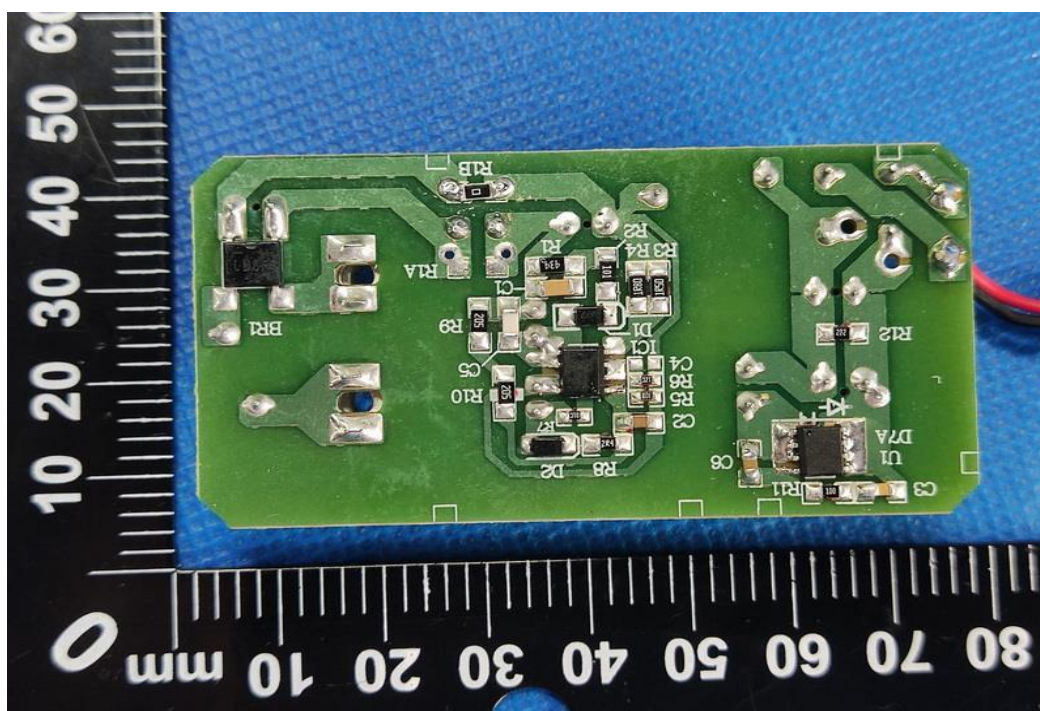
PCB view with U1+C6 (without D7A), for PCB layout PCB-T985
